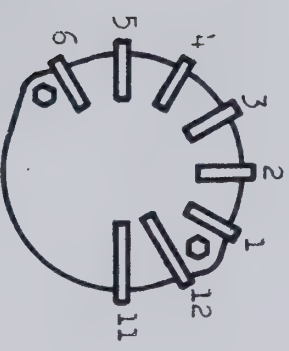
D. SW6, COUPLING SWITCH, REAR VIEW, BOTTOM SIDE OF CHASSIS UP
